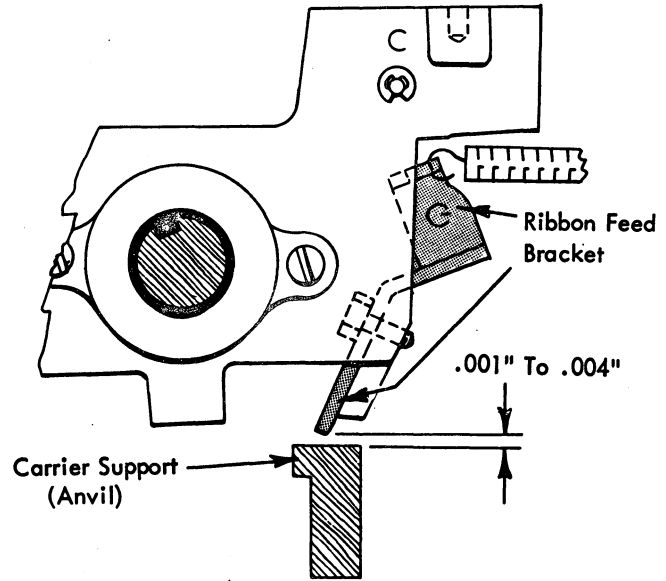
Carrier Support (Long Carriage Machines)
